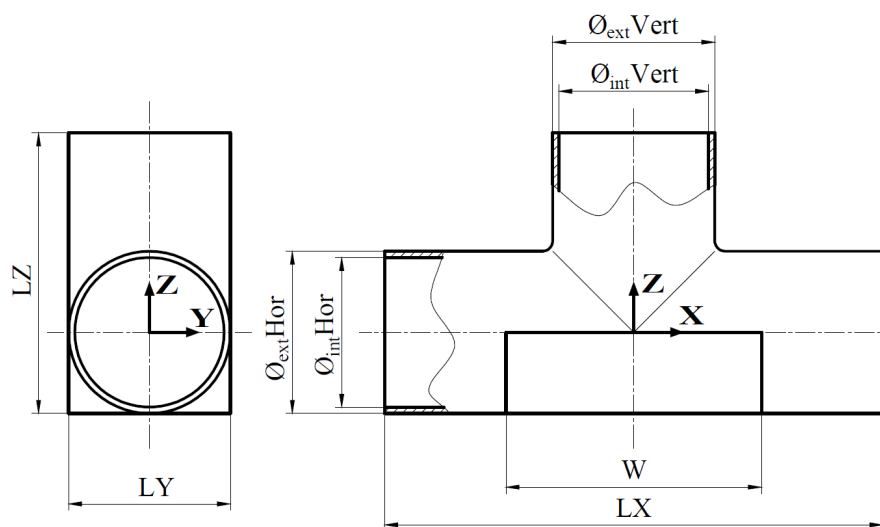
Designed tee connector geometry, indicating the relevant dimensions of the component.
